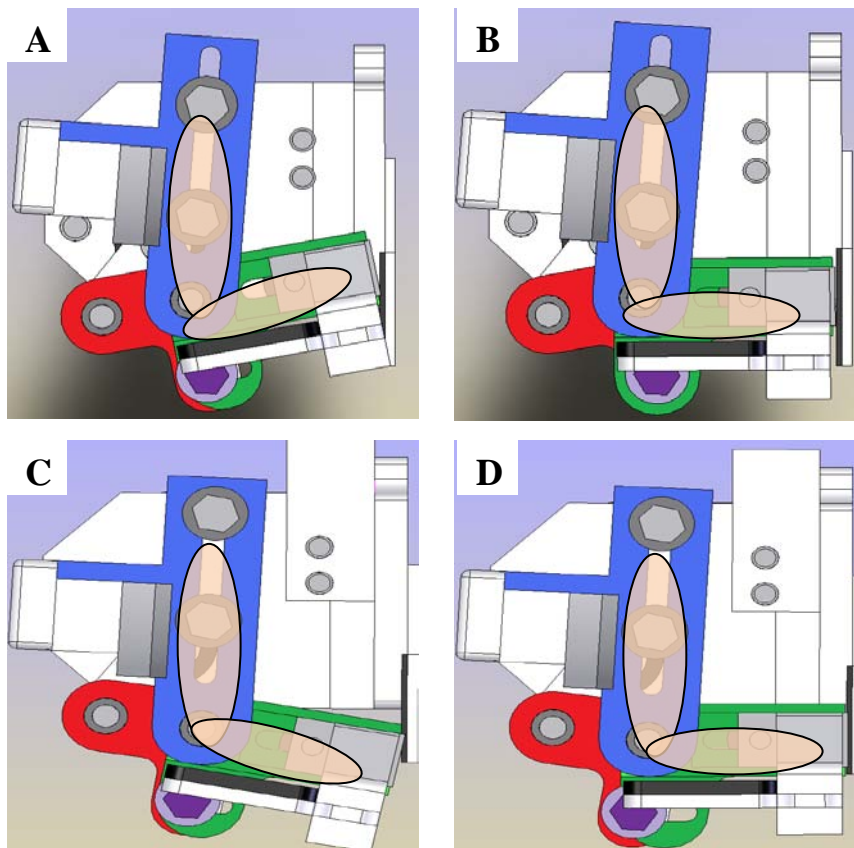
Finger component modeled by 3-dimensional computer automated design software. The system consists of a geared DC motor with an encoder and a torque sensor between the motor's gear head and the finger/exoskeleton interface.
